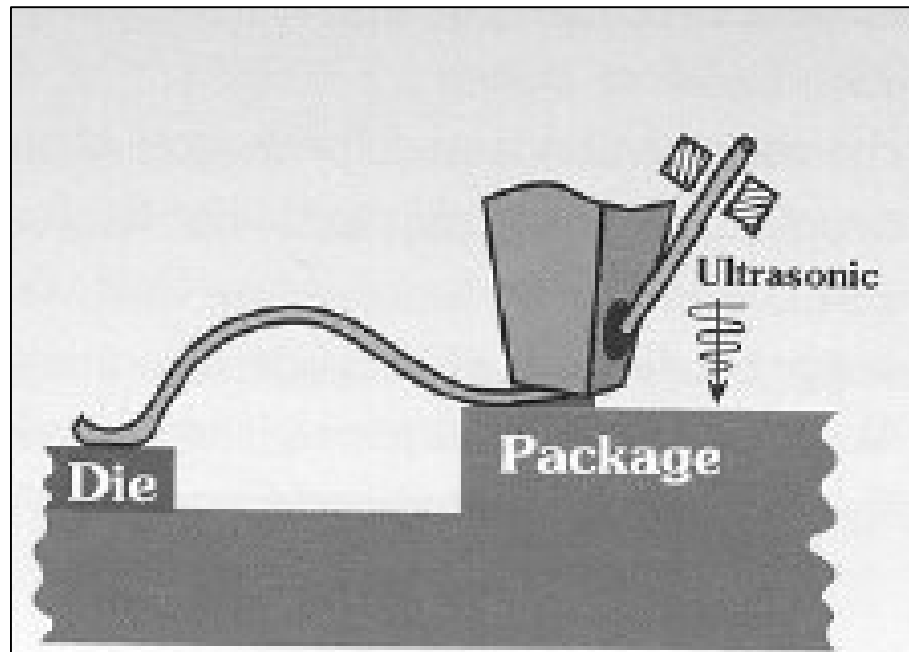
Wedge tool is used to place a wedge bond [12]
